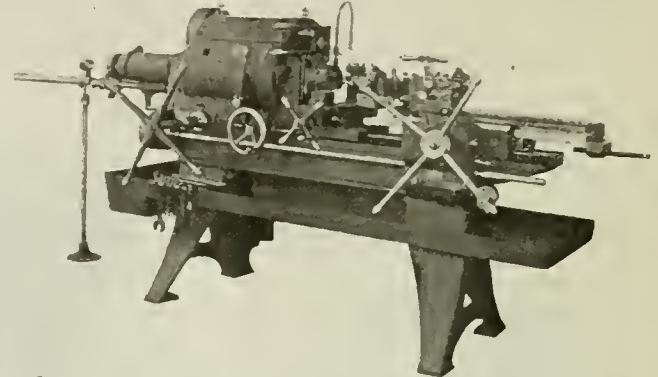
GEARED HEAD SCREW MACHINE WITH TOOL EQUIPMENT FOR BAR WORK.
